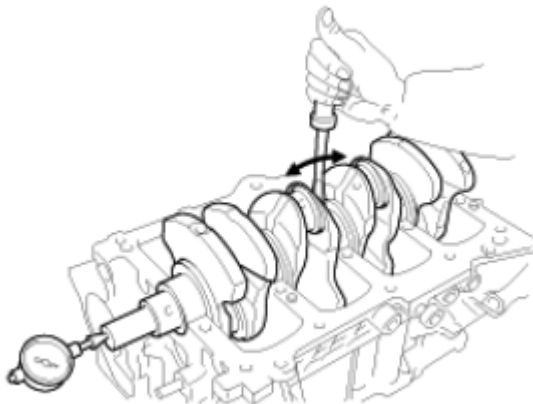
Measuring Crankshaft End Play Using Dial Indicator
